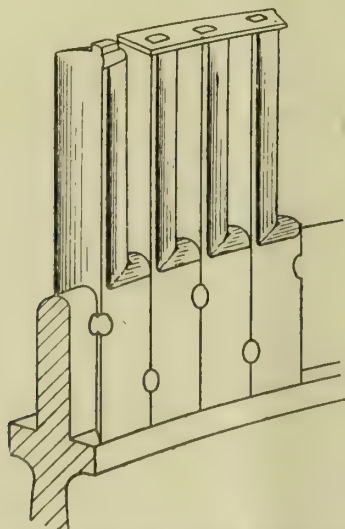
THE METHOD OF FIXING THE LONG BLADES OF A FRASER AND CHALMERS TURBINE.
